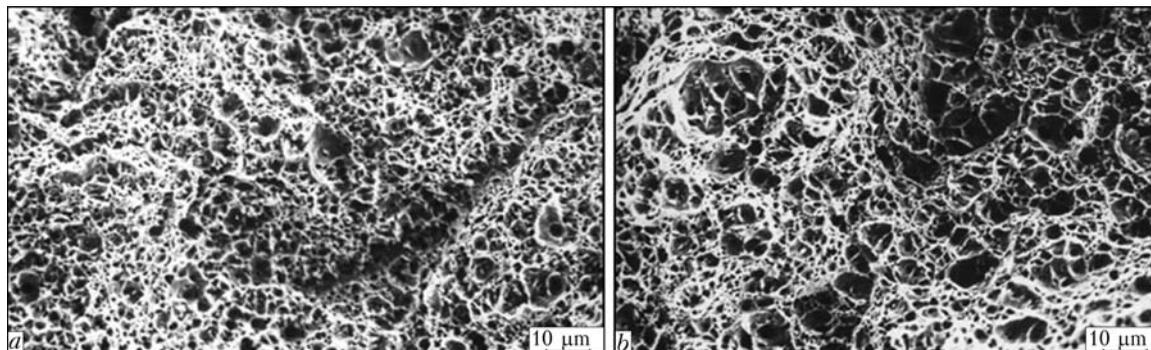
Fractographs of fracture surface of base metal in initial state (*a*) and after annealing (*b*)
